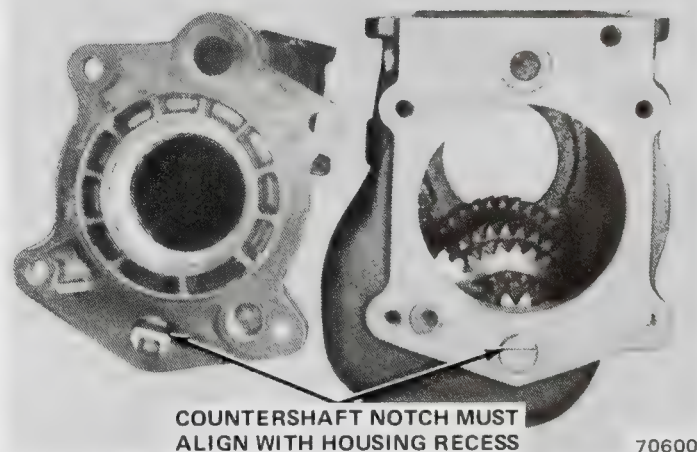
B-72 Countershaft-to-Extension Housing Alignment
